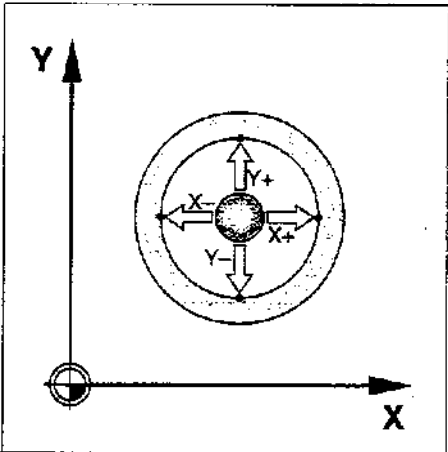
Probing the inside of a cylindrical surface to find the center
